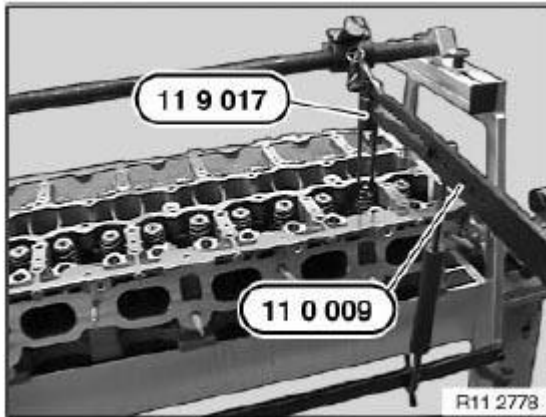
Identifying Special Tools 11 0 009 And 11 9 017
